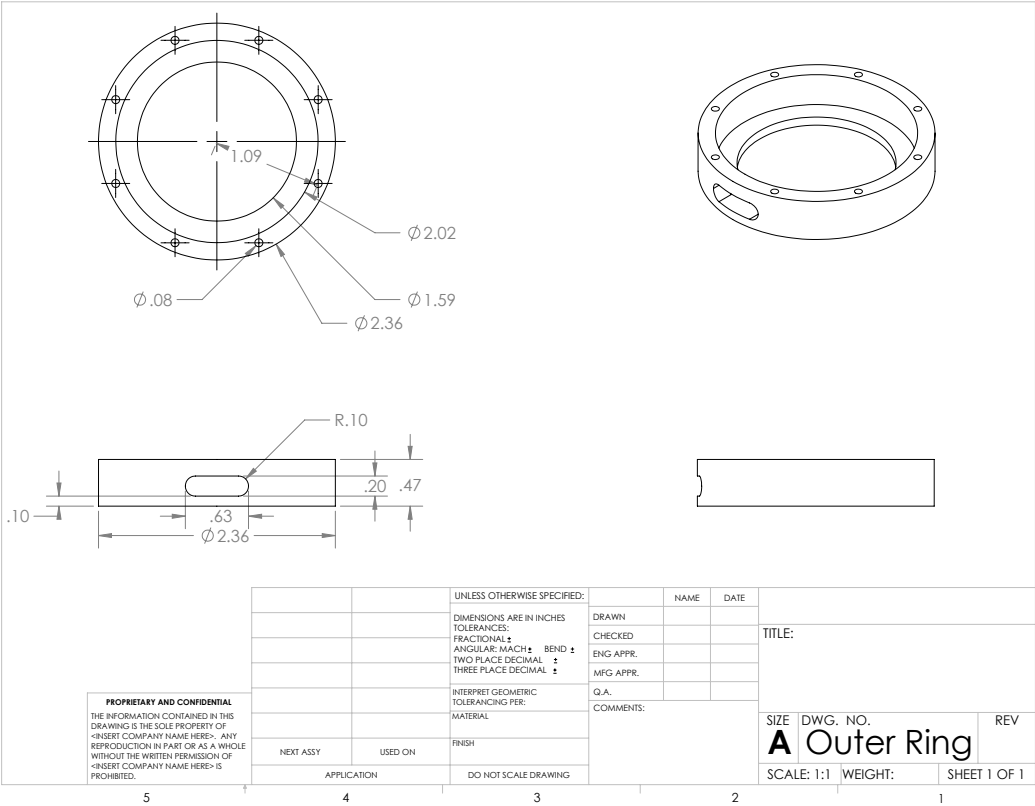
Design of the outer ring of the 3D-printed cell holder.
